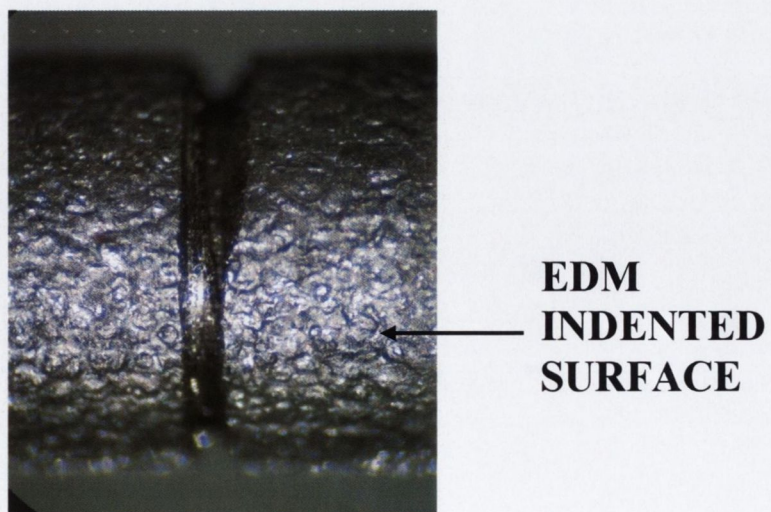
Roughened surface on the workpiece due to the EDM finish on the tooling.
